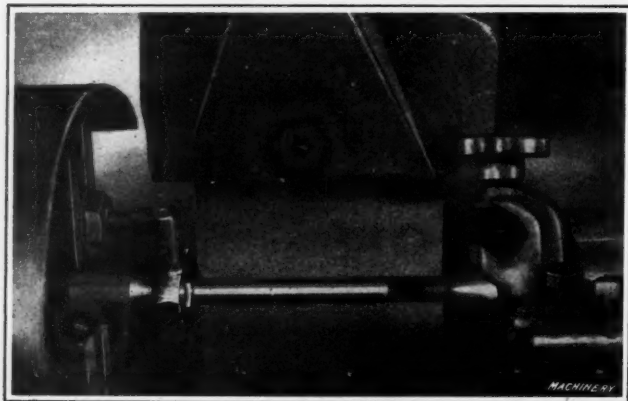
Set-up for grinding Front Axle Spindle Bolt in Norton Plain Grinding Machine
